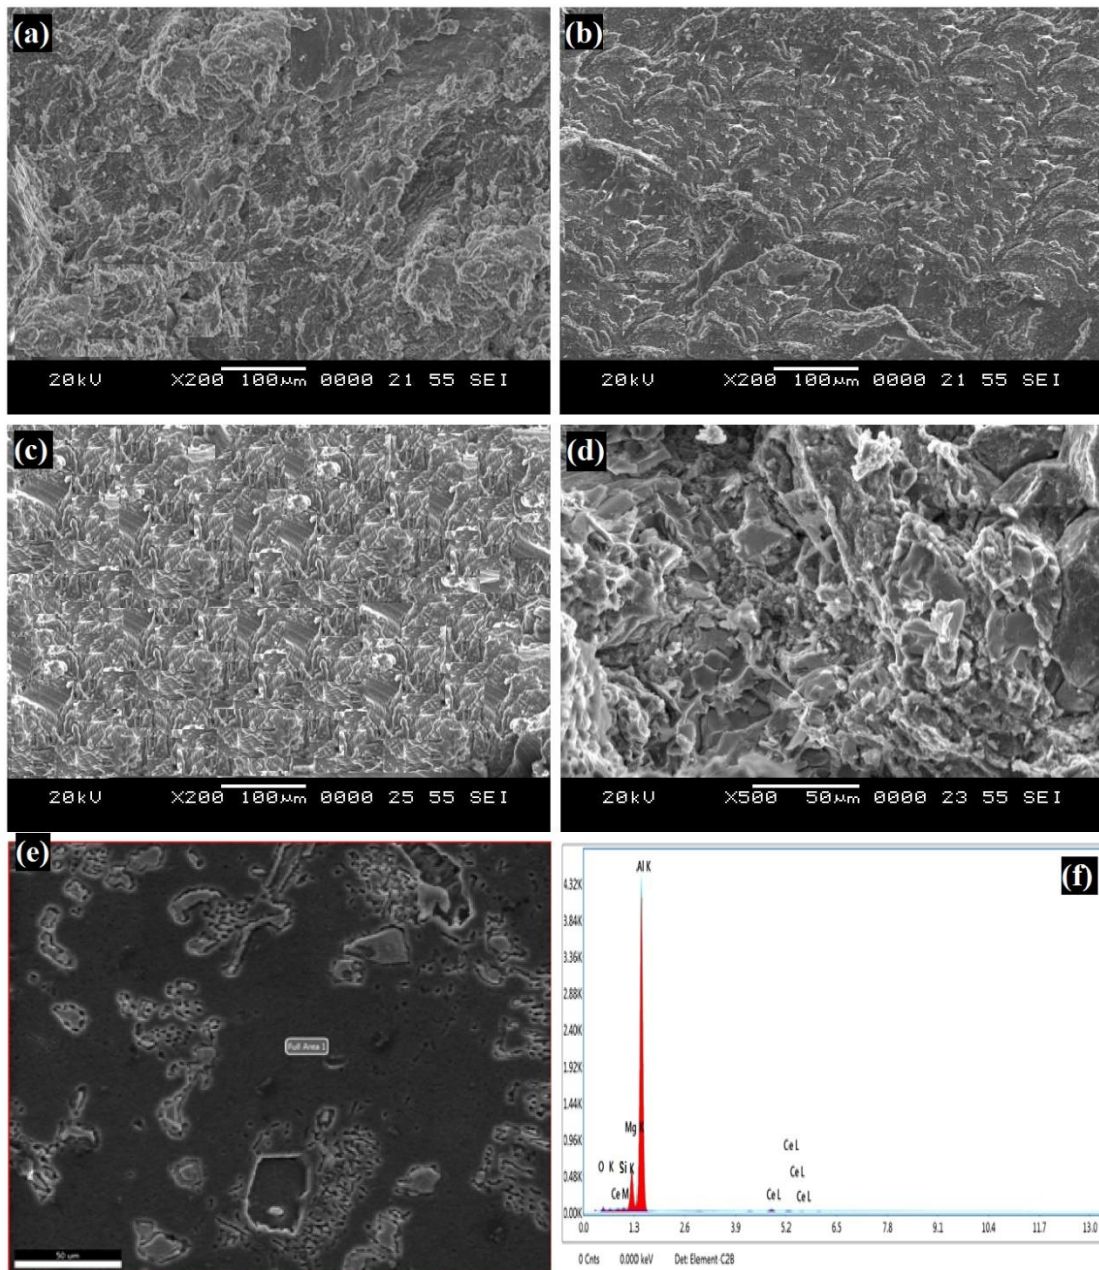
SEM images of tensile fracture surface (tested in the direction of weld) of Al-10Mg-8Ce-3.5Si aluminium alloy joints friction stir welded with TPP tool, at (a) Speed of tool rotation of 1000 RPM and welding speed of 10 mm/min, (b) Speed of tool rotation of 1000 RPM and welding speed of 15 mm/min, (c) Speed of tool rotation of 1000 RPM and welding speed of 20 mm/min, (d) Higher magnification image showing the dimples, pullout, decohesion and cracked AlSiMg particles, (e) Spot EDAX image and (f) EDX spectrum showing the presence of Si, Mg and Ce peaks.
